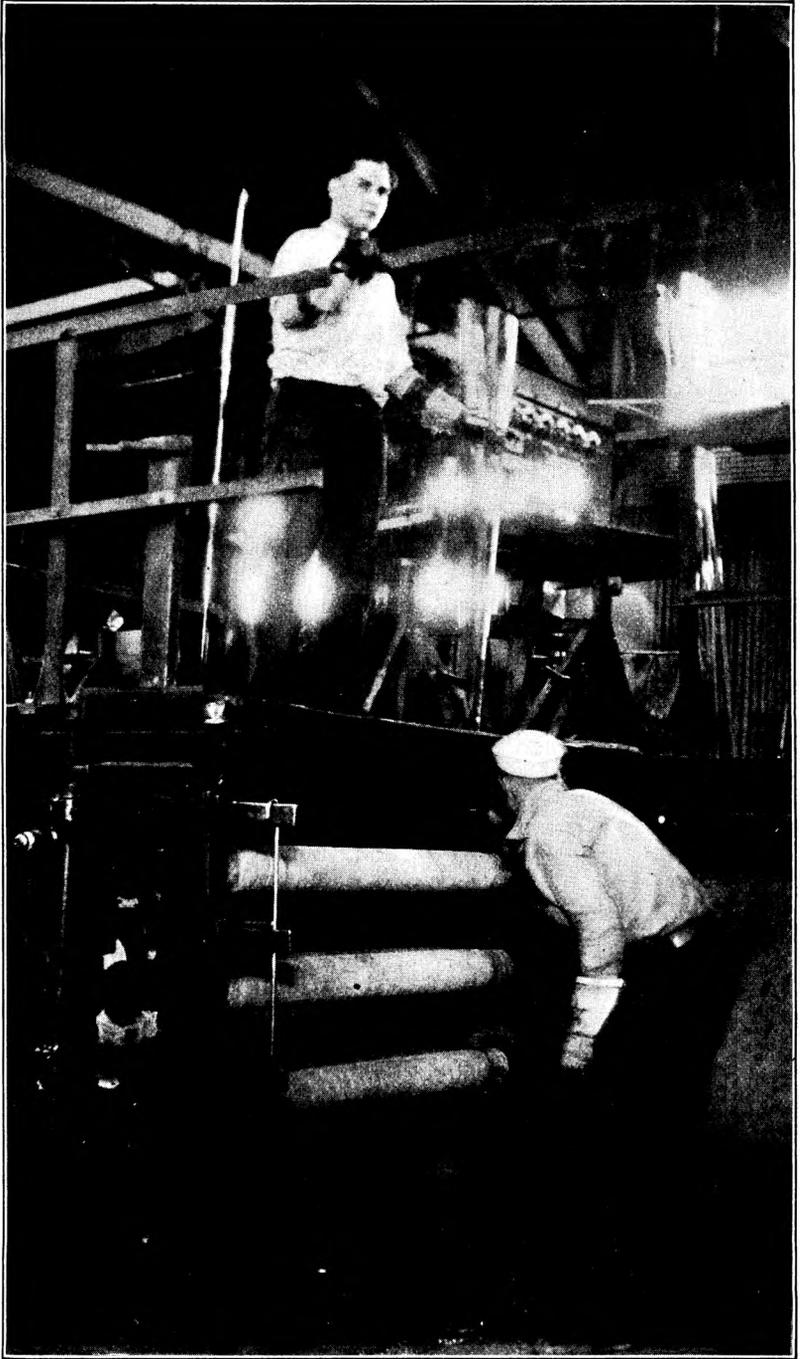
FOURCAULT AUTOMATIC MACHINE FOR MAKING WINDOW GLASS
